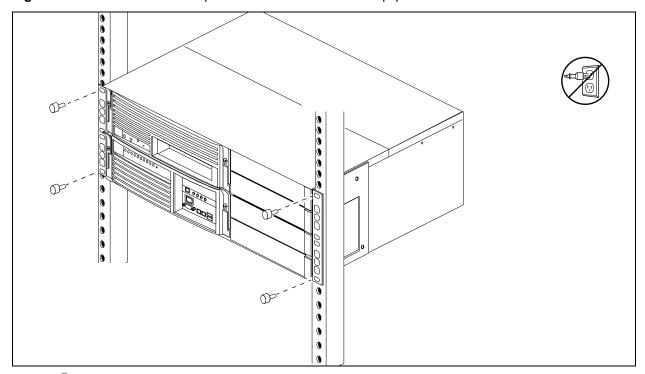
Fasten the BCM400 platform base chassis to an equipment rack
